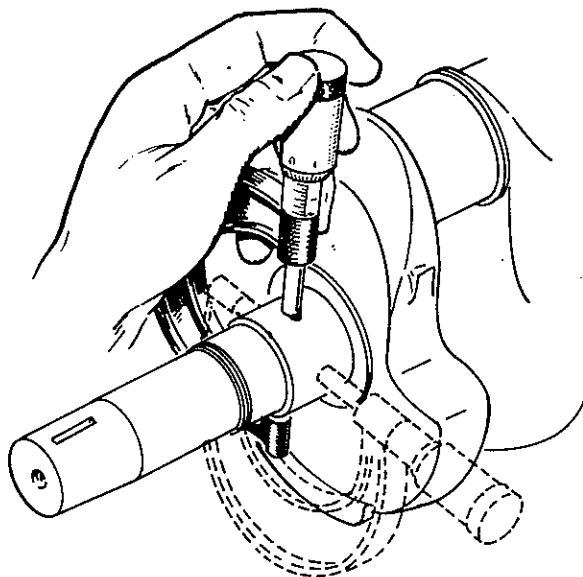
MEASURING CRANKSHAFT JOURNAL
